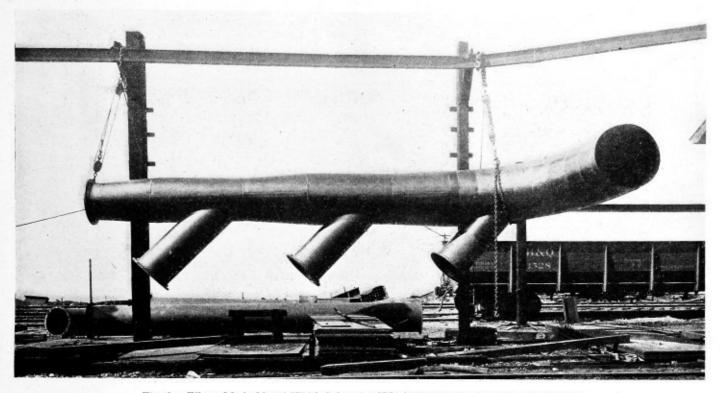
Elbow Made Up of Welded Sections Which Connects with 40-Inch Blast Main
